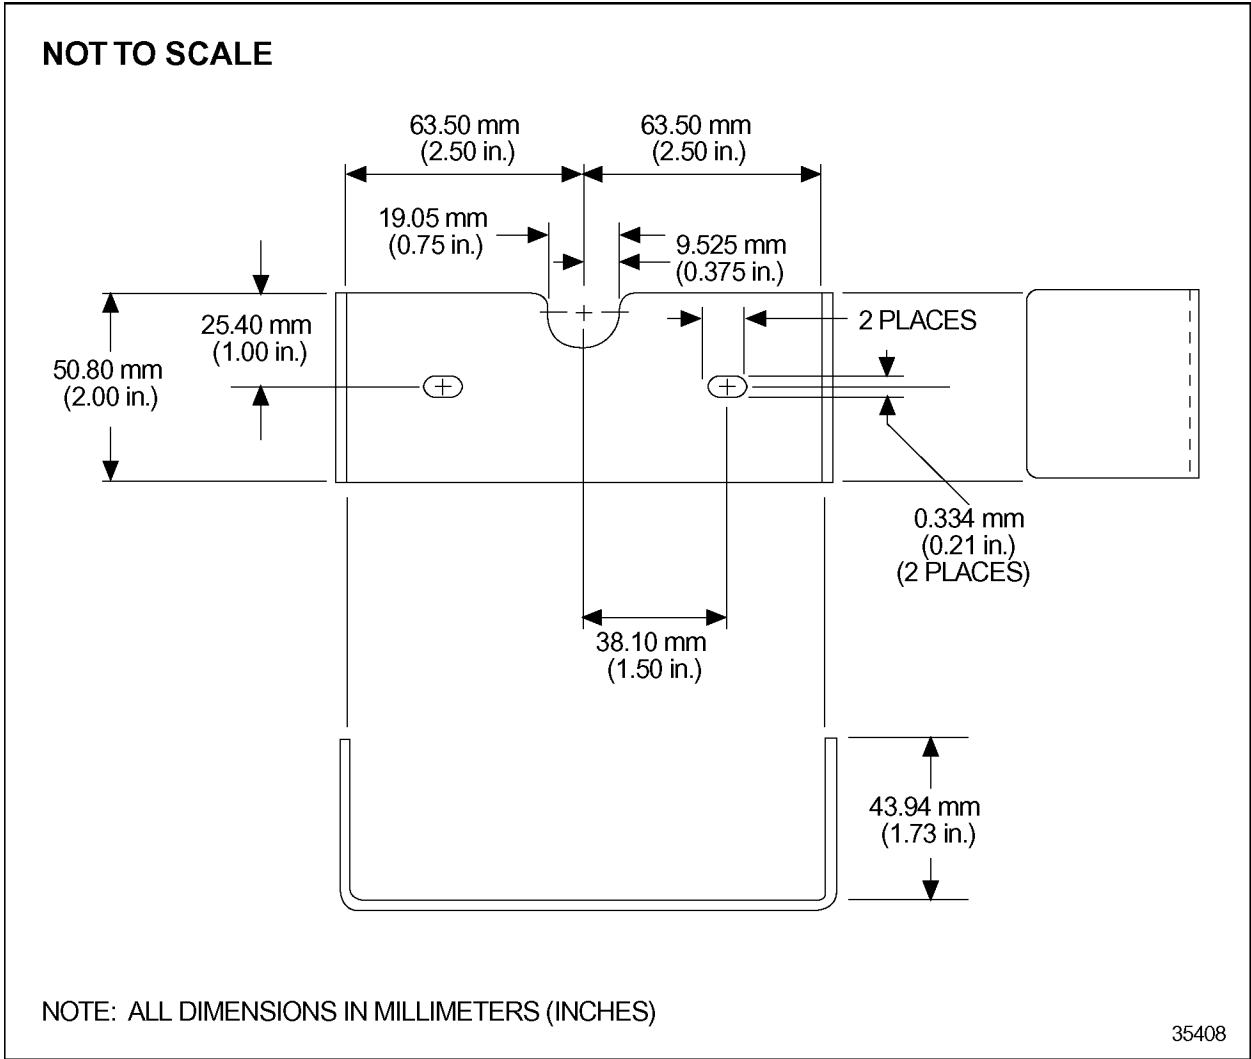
ProDriver Flush Mount Mounting Bracket
